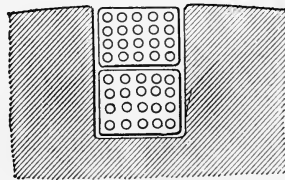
CROSS SECTION OF ARMATURE SLOT, SHOWING ARRANGEMENT OF WIRES.
